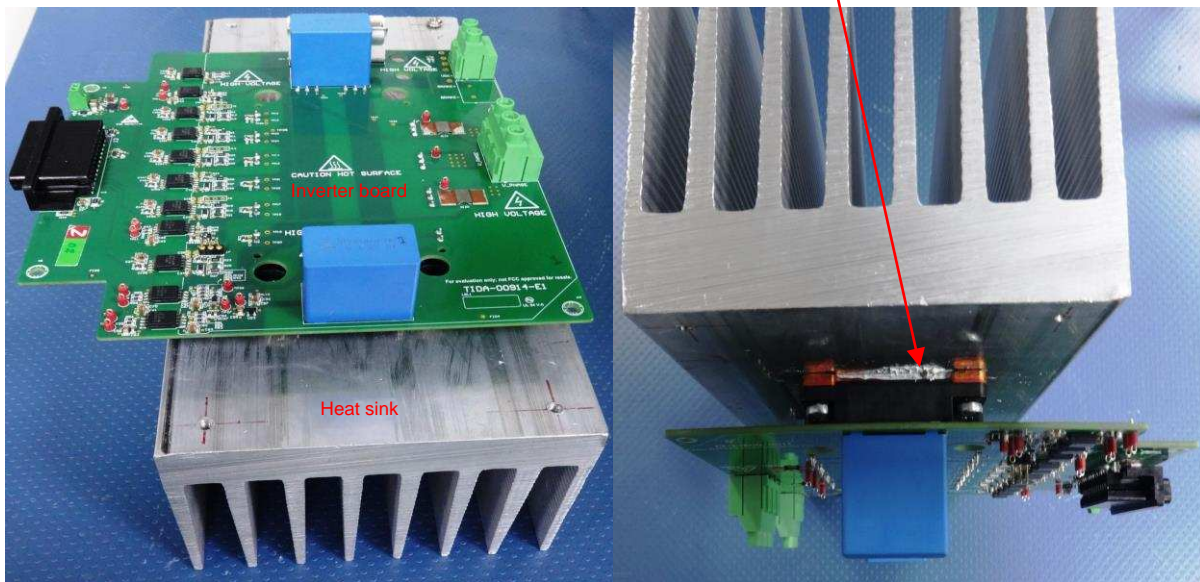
shows the bottom view of the PCB. Provision is given for adding brake chopper IGBT Q1 and freewheeling diode D9. The pad of the IGBT module has to be connected to a heat sink. The thermal compound has to be used between the pad and the heat sink, and the module must be rigidly screwed to the heat sink as shown in Figure 19. Choose an appropriate heat sink based on the maximum continuous power to be dissipated.
